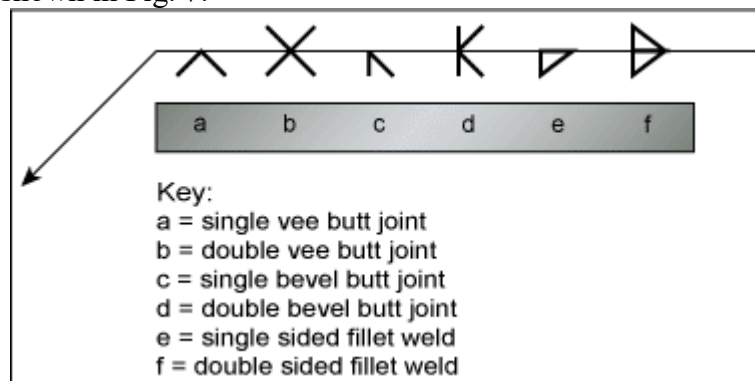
The symbols used in arc and gas welding. (The welding institute n.d.)
